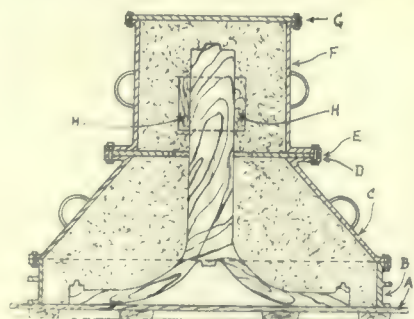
PATTERN MOULDED ON FLOOR BOARD READY FOR TURNING OVER.
